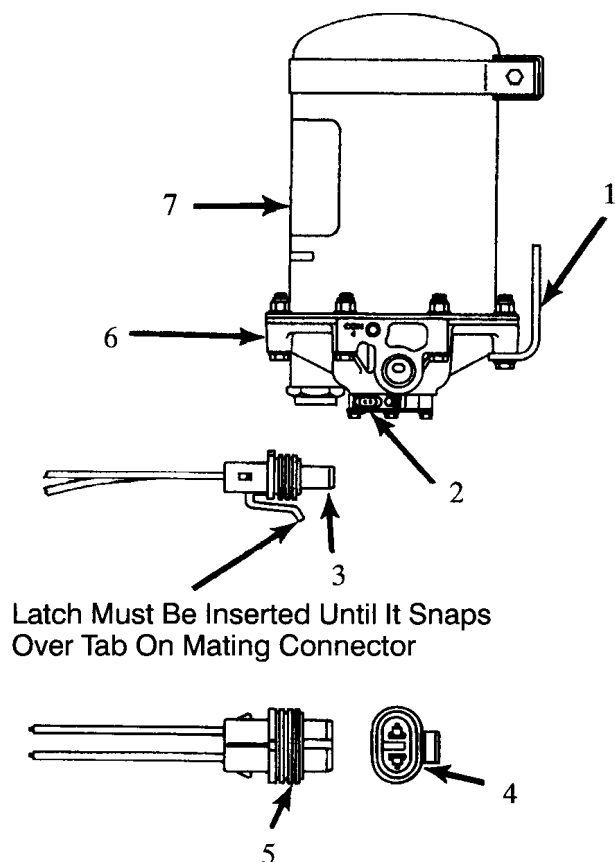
AD-9 Air Dryer - Thermostat and Heater Assembly
